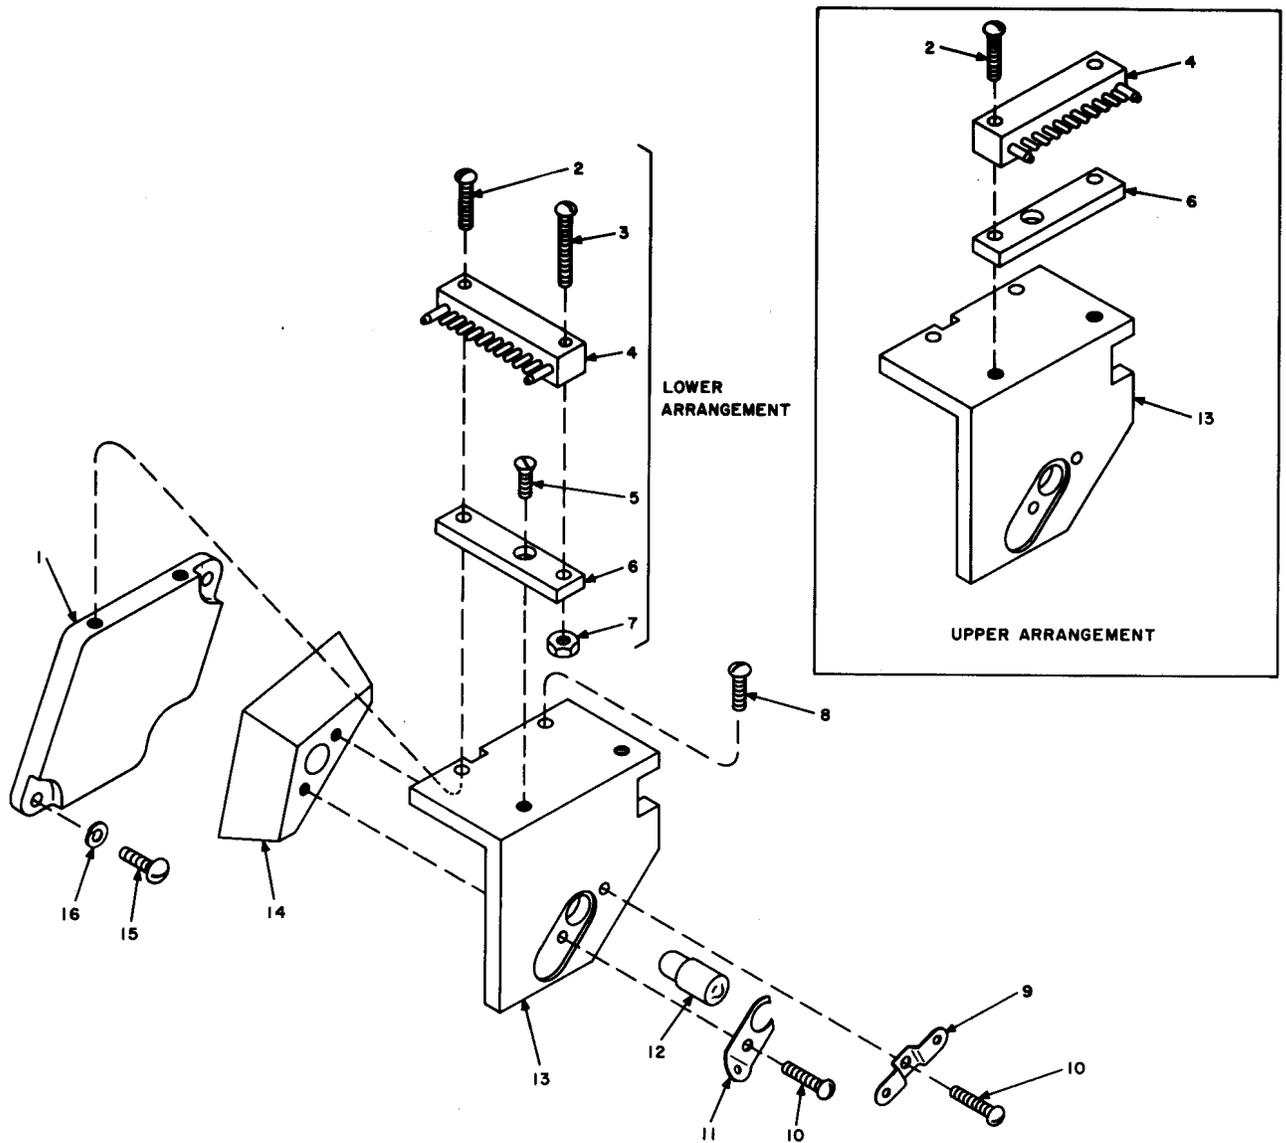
Printed Circuit Board Chassis L-502590 and Printed Circuit Board Assemblies
